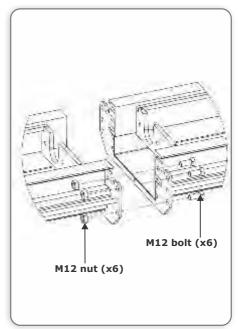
ASSEMBLE MODULAR STRUCTURE
